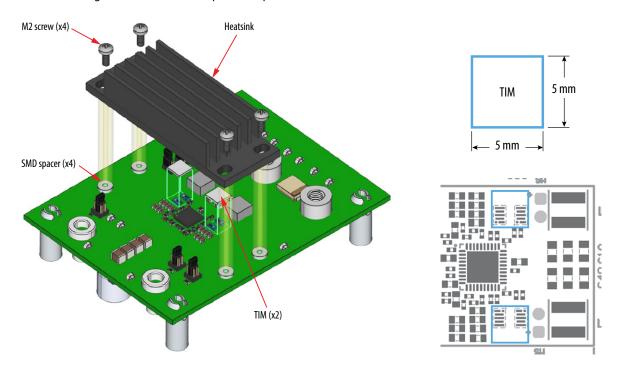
Exploded 3D assembly of heat sink installment and locations of TIM material
